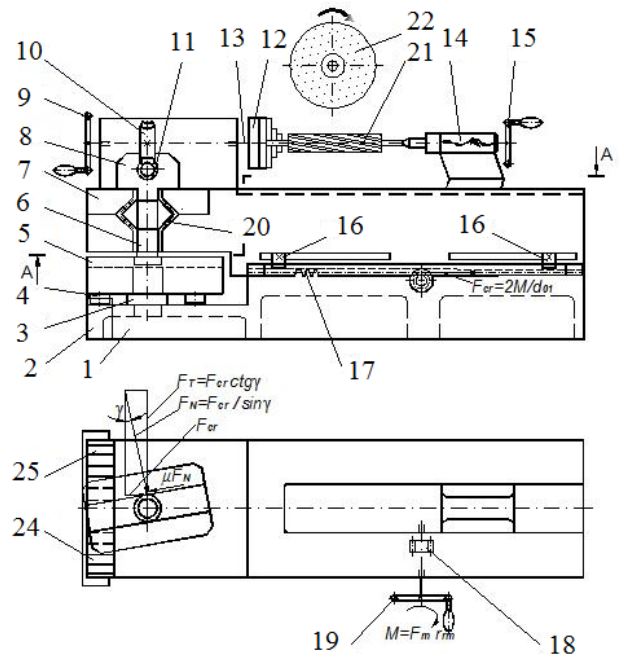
The operating principle of the grinding device for helical surfaces with adjustable step and tilting slider
